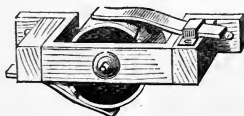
Commutator Bearing, showing Position of Brushes.
